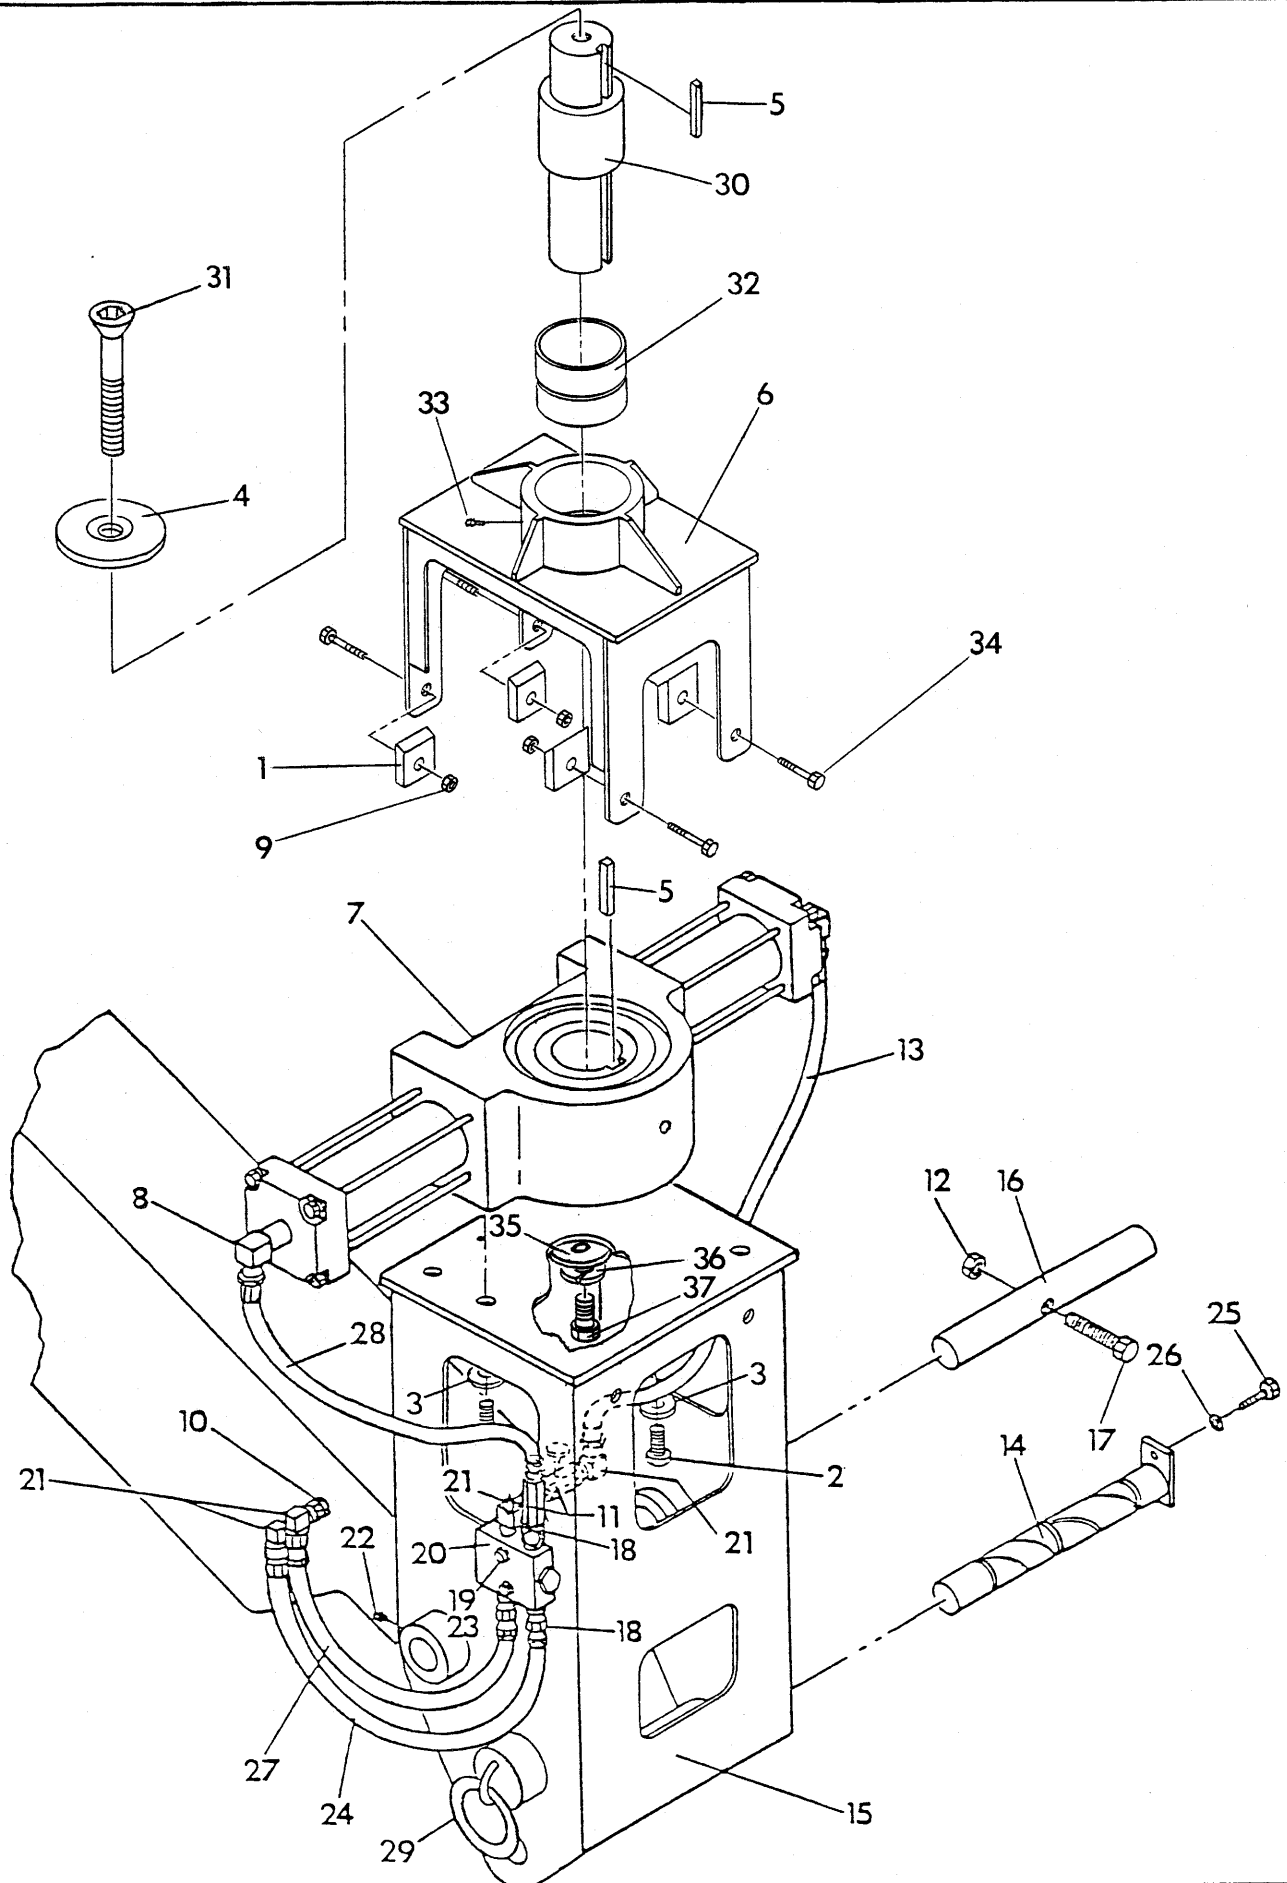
X PLATFORM ROTATION ASSEMBLY (Actuator with hollow pinion)
